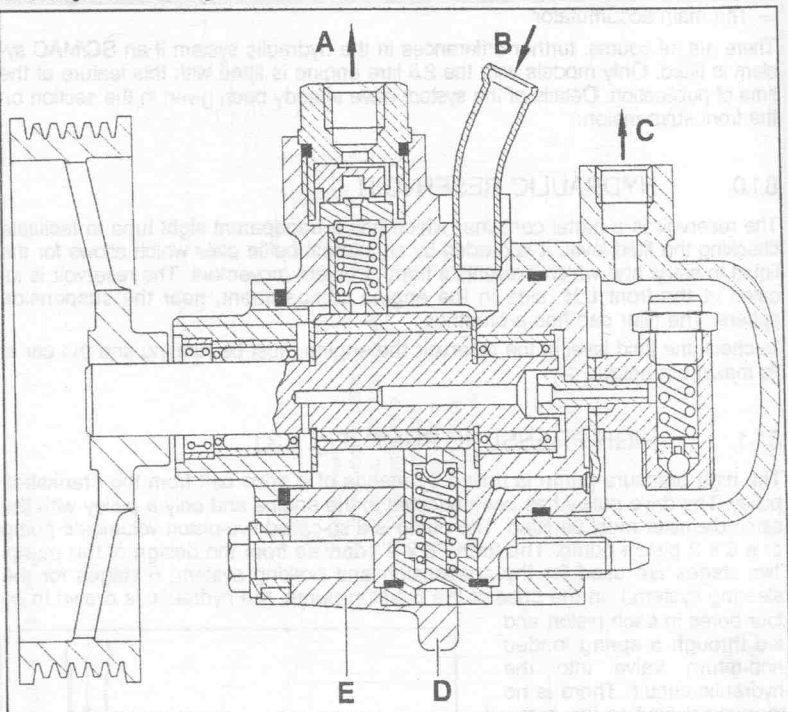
Sectional view of the 6 x 2 piston pump (DK5 engine only).
